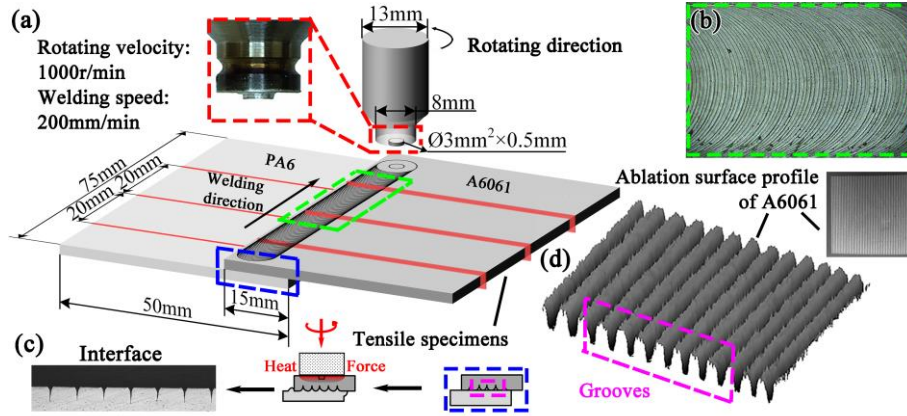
Schematic of the FSW process: (a) illustration of welding tool and specimen dimensions; (b) the top view of weld; (c) illustration of thermal-mechanical behavior in FSW; (d) 3D view of micro-textures produced on A6061.
